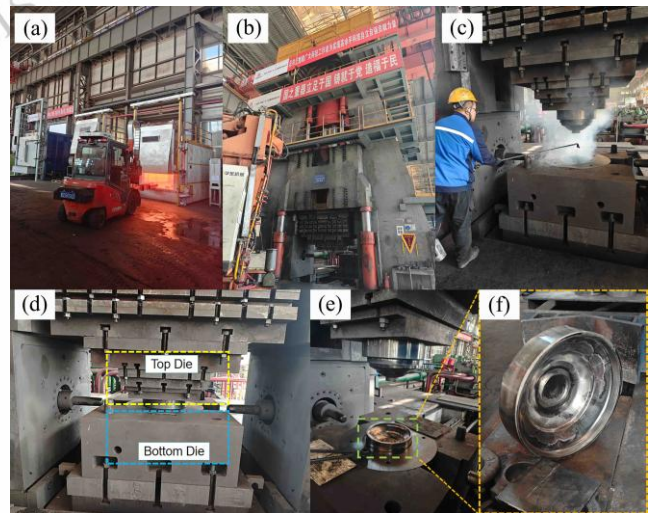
Experiments on the forging of 7050 aluminum alloy wheels: (a) preheating of the billet, (b) forging press, (c) lubrication, (d) forging die, (e) die opening, (f) forged part
